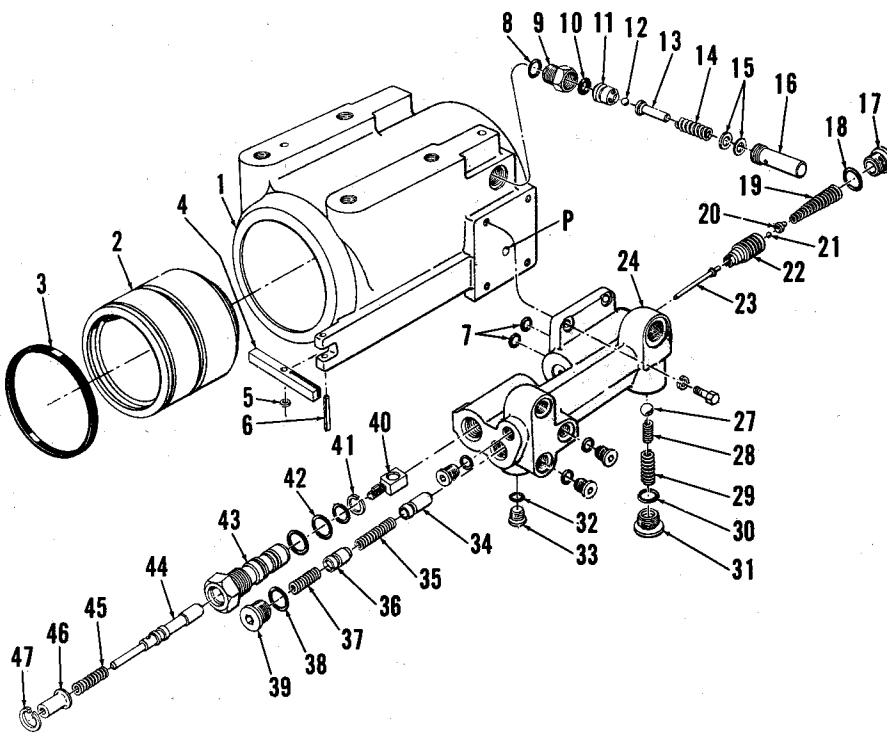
Exploded view showing hydraulic lift cylinder and control valve assemblies. Cylinder and control valve are removed as a unit, then control valve body can be unbolted from cylinder. When in fully raised position, piston (2) skirt contacts pivot arm (4) moving control valve (44) to neutral position. Safety valve (items 8 through 16) limits pressure in lift cylinder to 2650-2750 psi, thus preventing damage due to shock loads.
